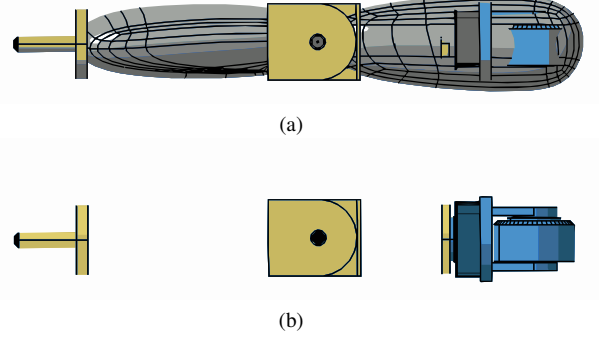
(a) Design space and (b) blocker joint geometry of the robot arm
